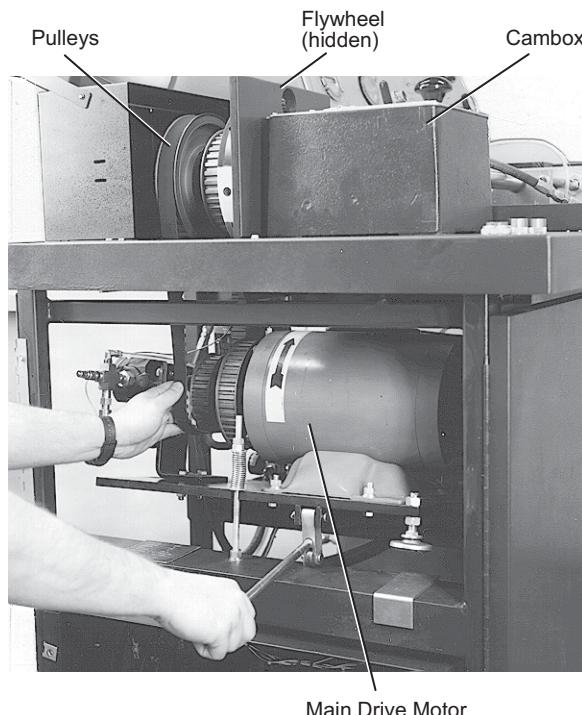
Main Motor, Pulleys, Flywheel, & Cambox
